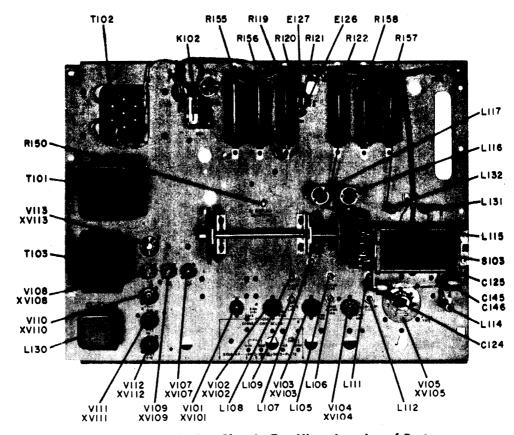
Exciter Chassis, Top View, Location of Parts
